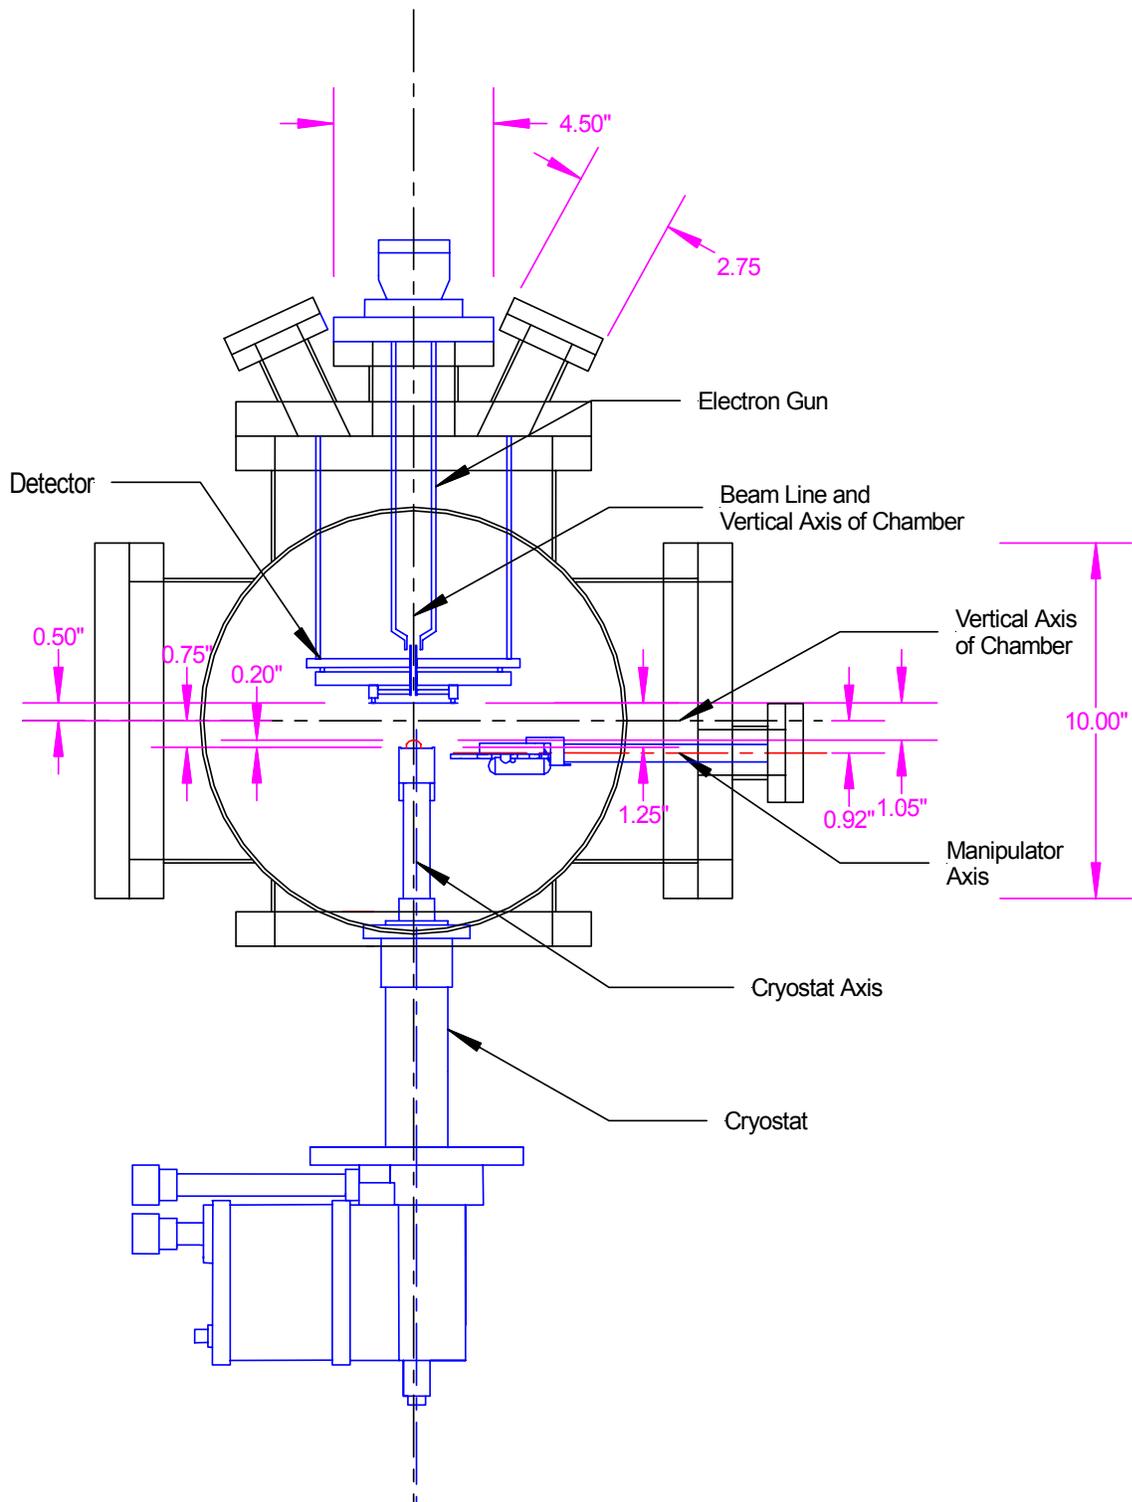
Side view of a mechanical drawing showing the alignment of a cryostat with sample, a manipulator, an electron gun, and a detector connected on a spherical vacuum chamber.
